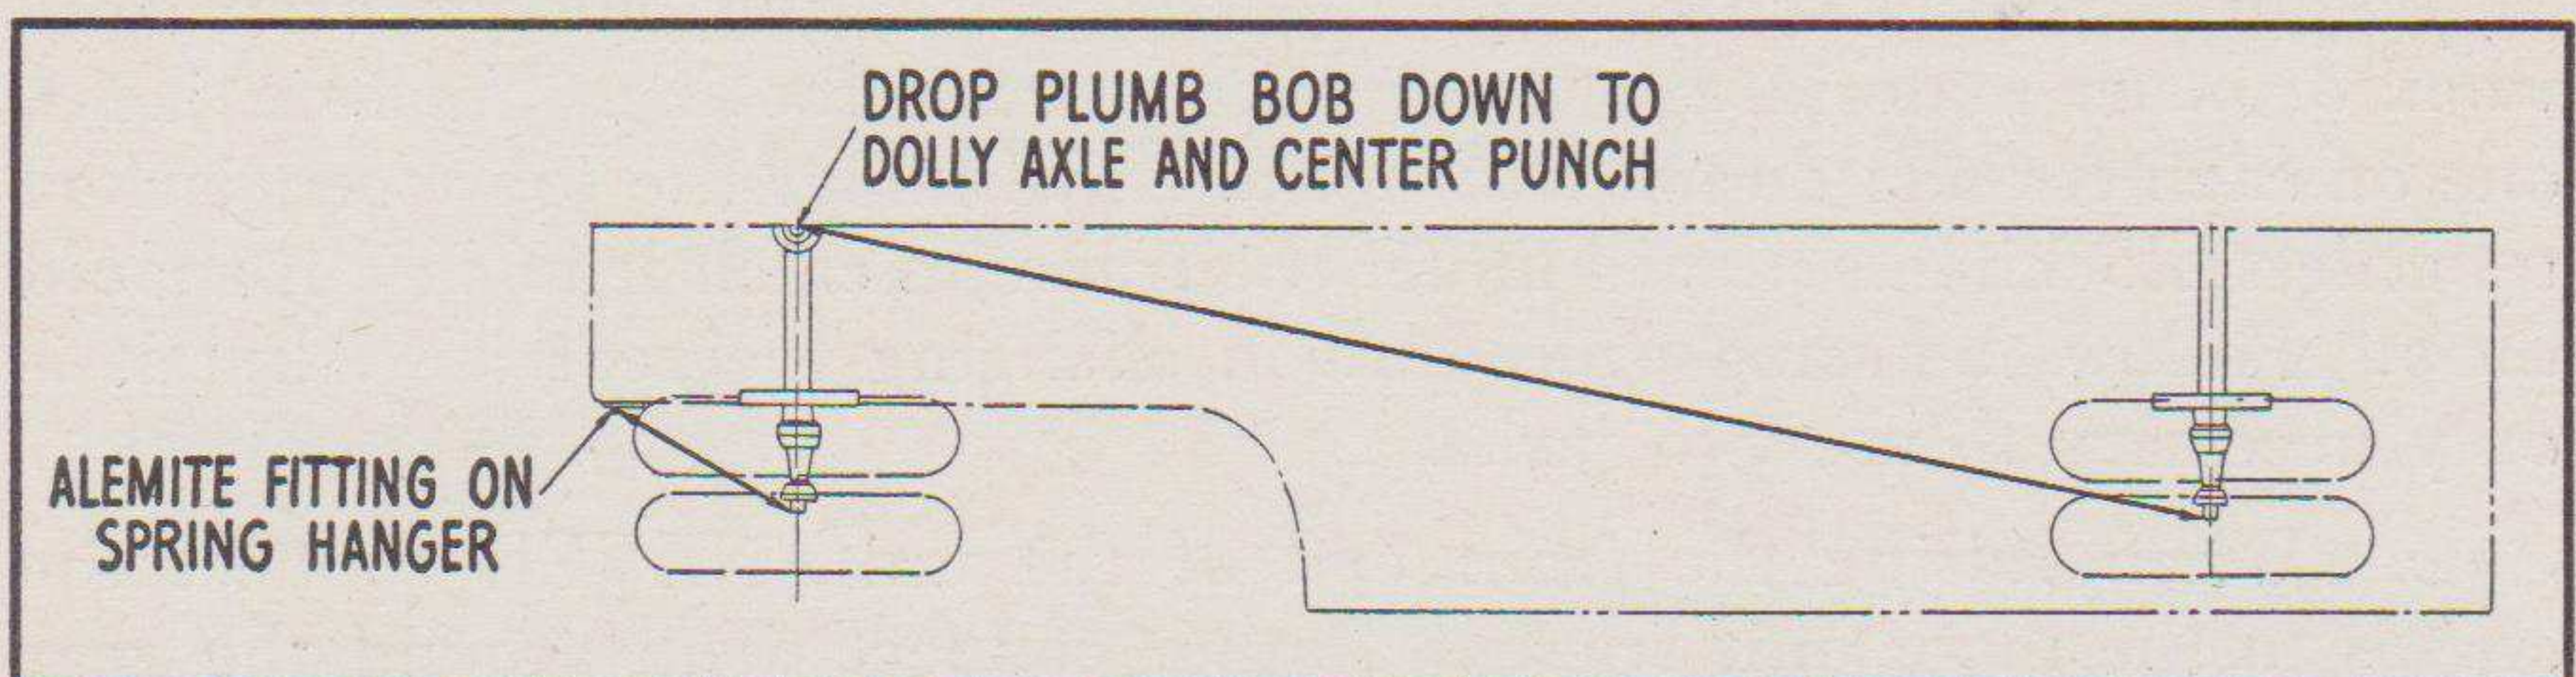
FRONT AND REAR AXLE ALIGNMENT
